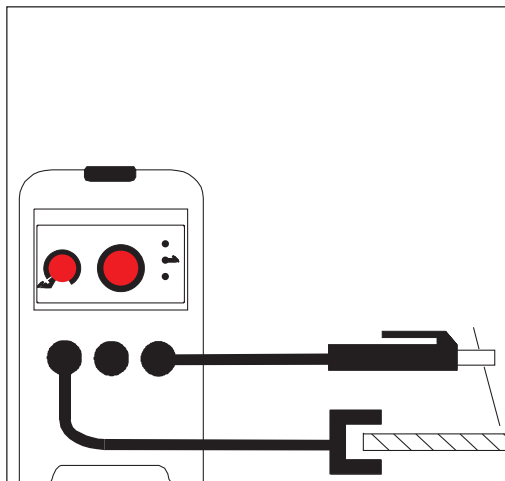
TP 2000 R.C. as a manual electrode welding unit
